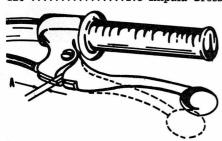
Clutch hand lever should have 0.039-0.078 in. free play at A.
